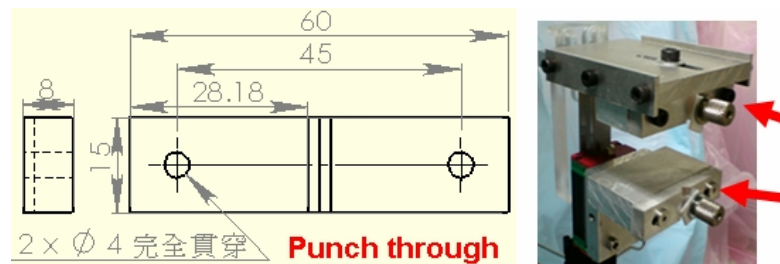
Engineering drawing for the upper part of ultra-long puller and photo of the upper part.
